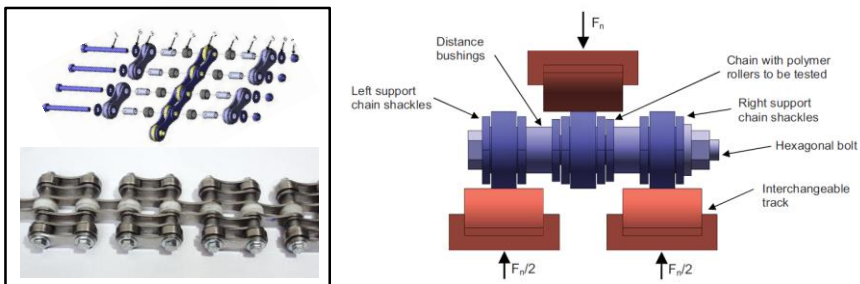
Schematic of loading mechanism and the conveyor chain assembly [C.1].
